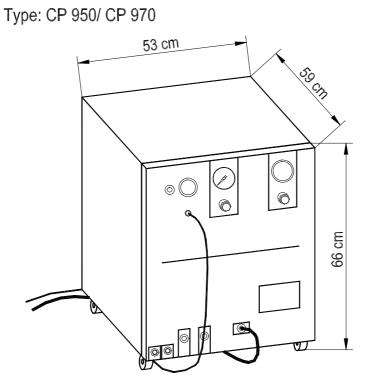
b: View of the Cryo-Refrigerator for Magnet Cooling
